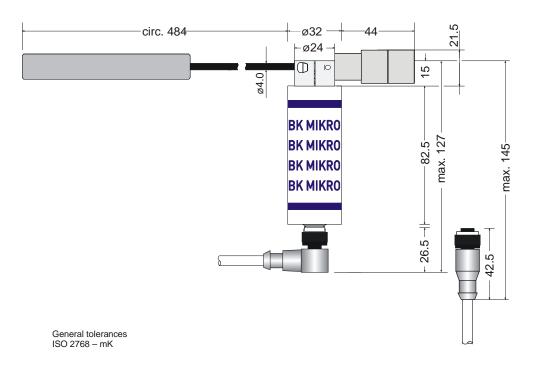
Mechanical Dimensions – Scanner TK91A
